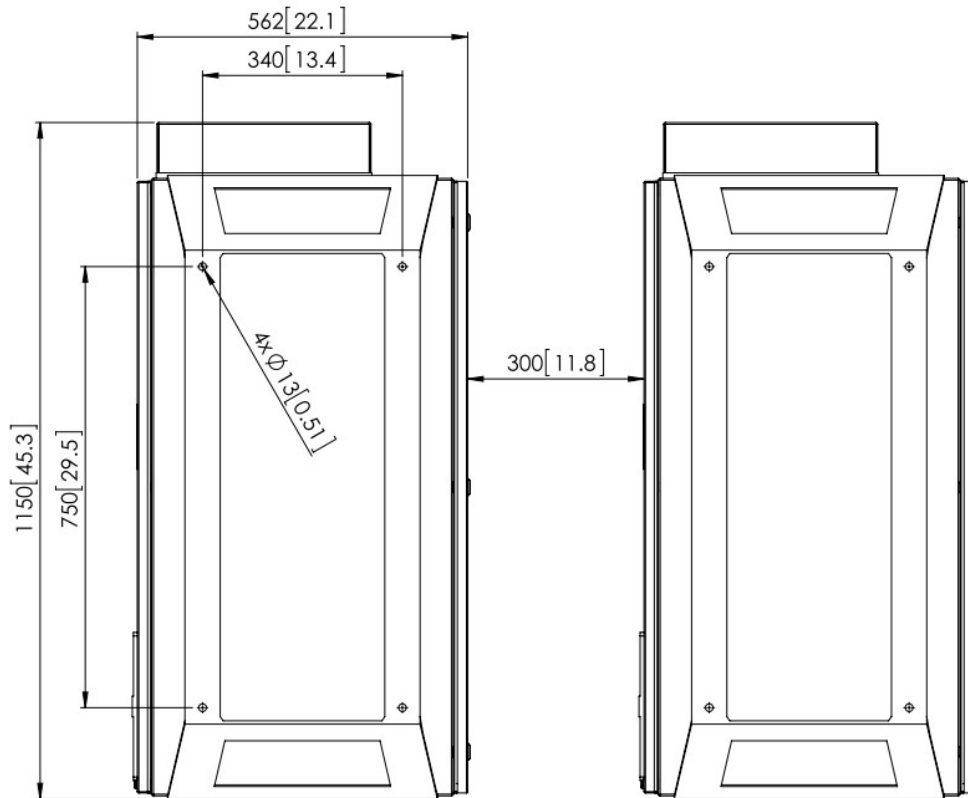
Mounting Holes & Spacing, Bridge-Mounted Unit
